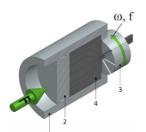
KOBO extrusion pattern 1- container sleeve, 2- dummy billet, 3- die, 4 – billet
